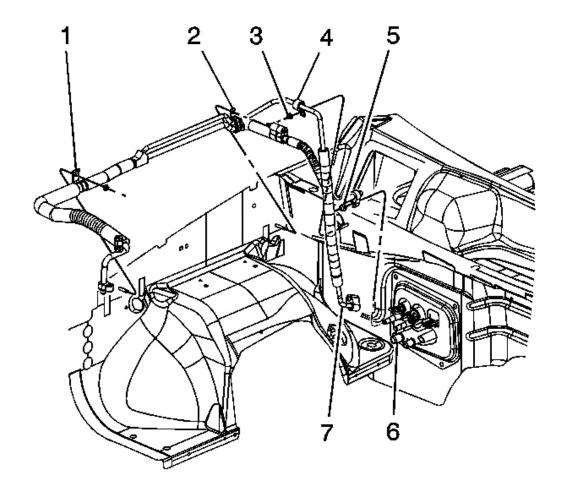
Removing/Installing Evaporator Tube (Long Wheel Base) Courtesy of GENERAL MOTORS CORP.
